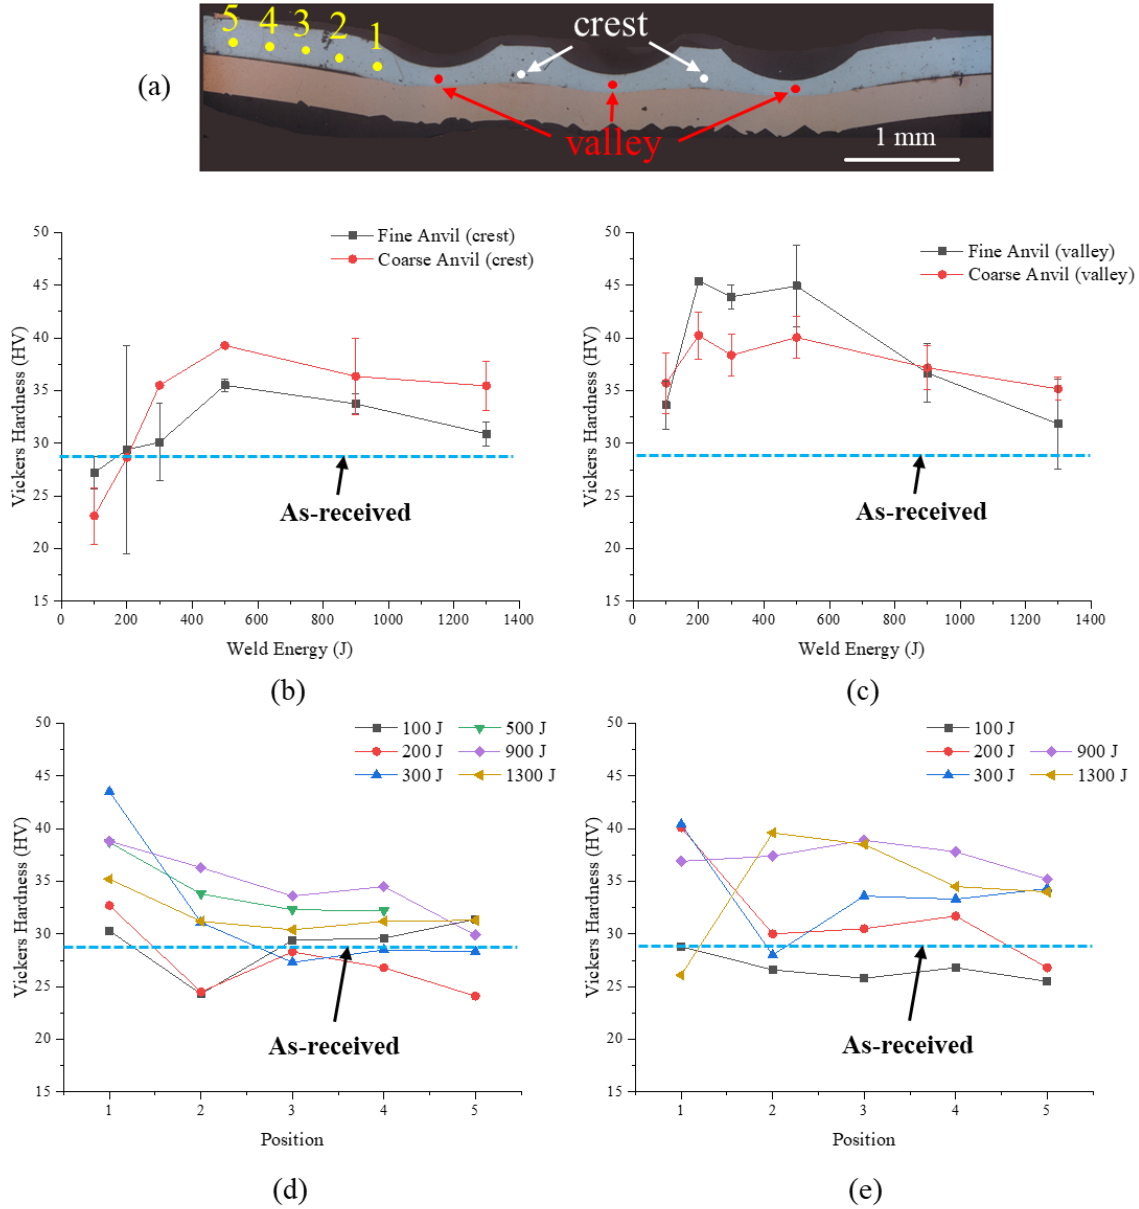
Hardness evaluation of welds for different weld energies and anvils: (a) cross-section image of weld made at 500 J using fine anvil, hardness profile of the weld interface at (b) crests and (c) valleys, and hardness profile out of weld zone for (d) fine anvil and (e) coarse anvil.
